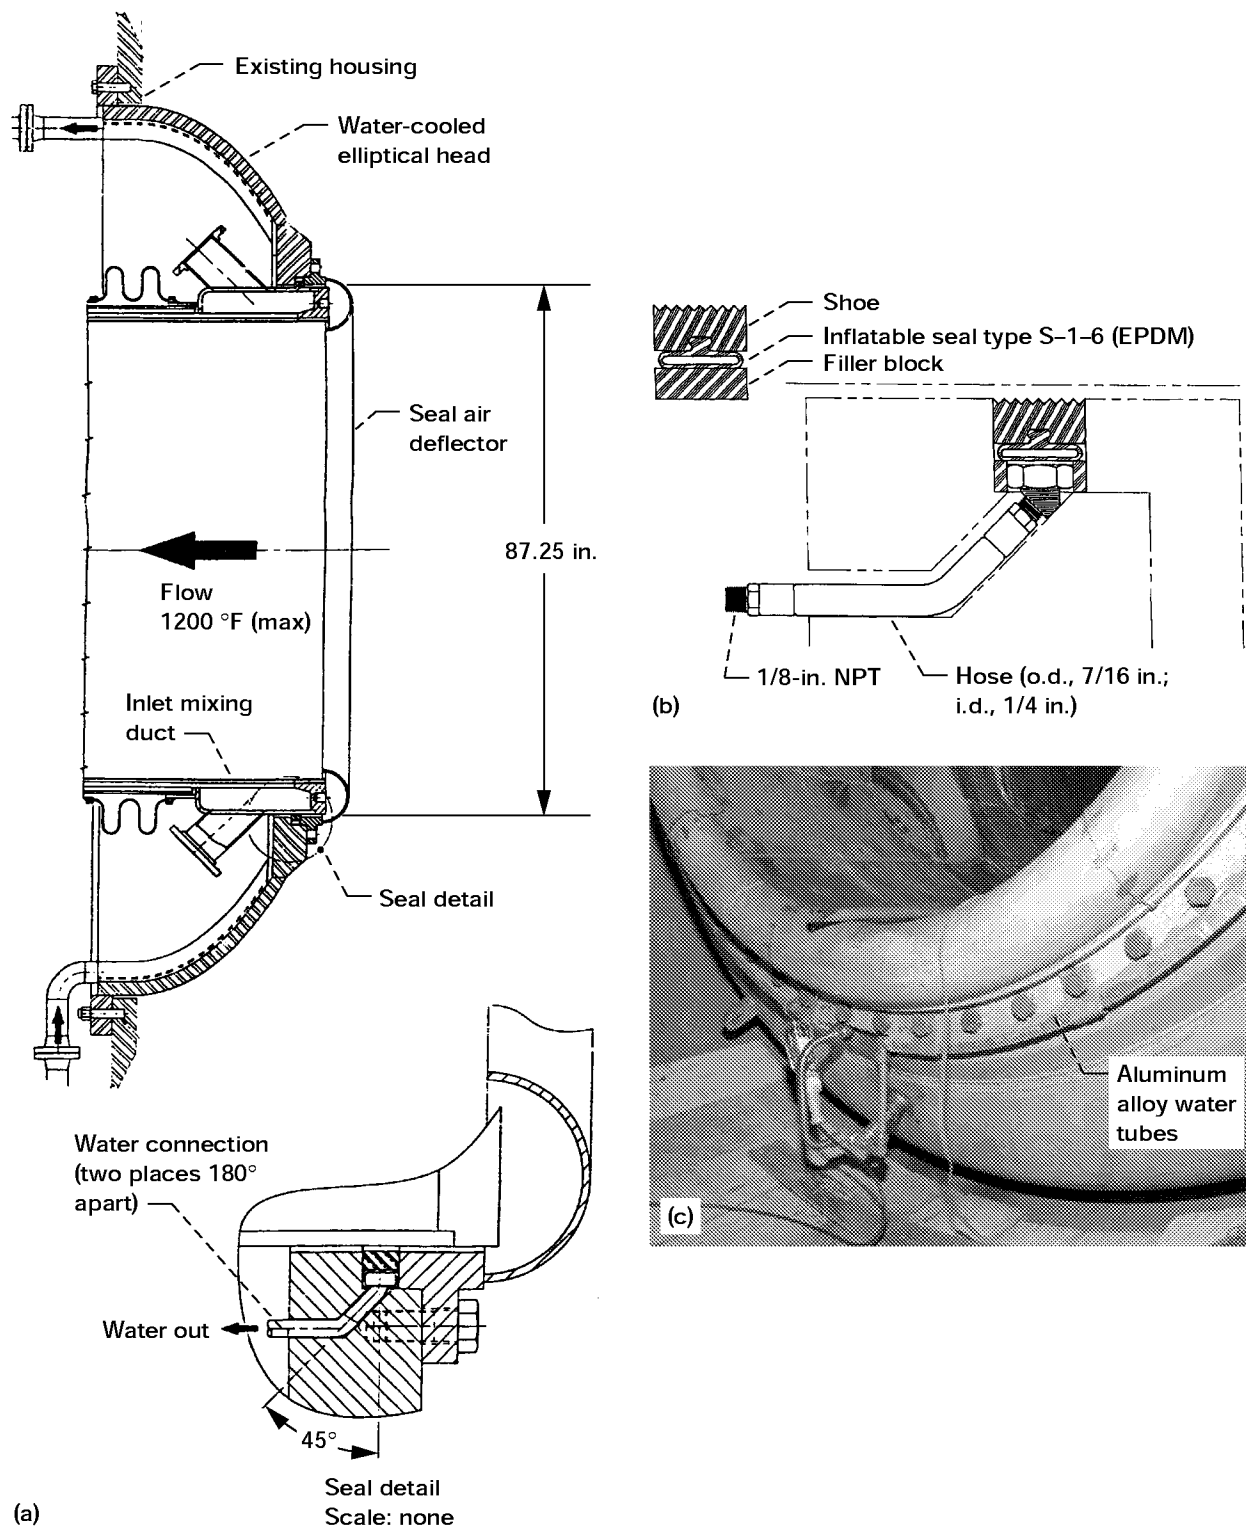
Plenum insert inlet showing location and details of seal between insert and isolation bulkhead.
